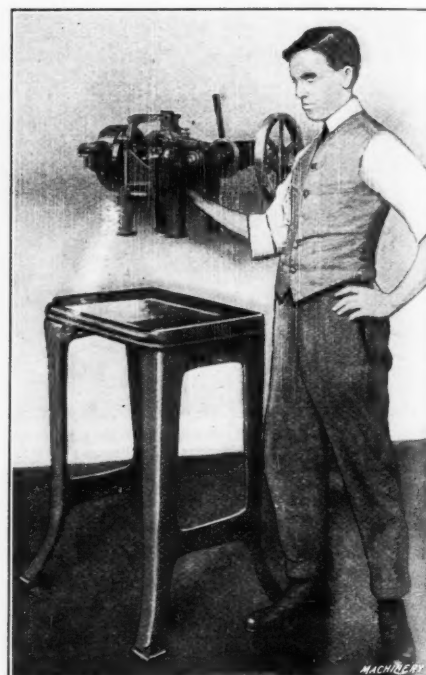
Paper Clip Machine which turns out Finished Clips at the Rate of 450 per Minute
